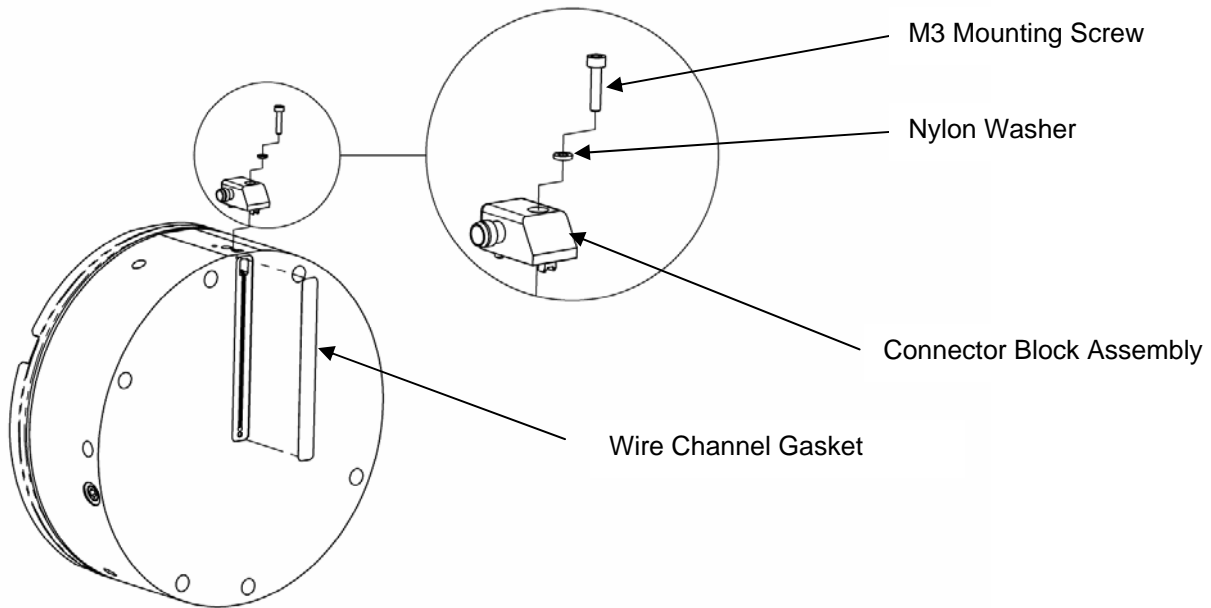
Removal of Connector Block Assembly and Switch Wiring
